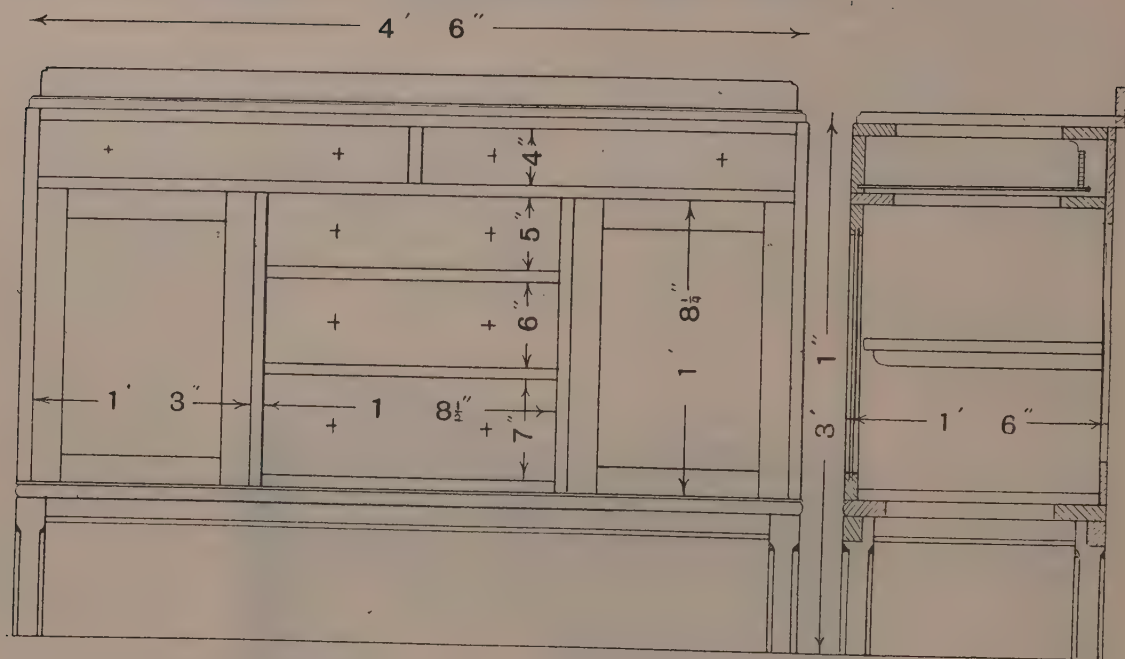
DIMENSIONED FRONT ELEVATION, WITH SCALE.
